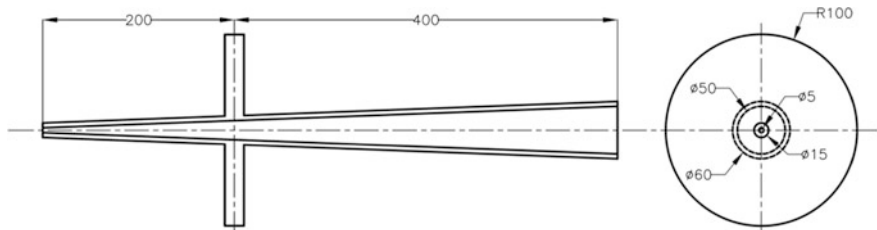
Tapered hollow rotor with eccentric disc for numerical analysis
